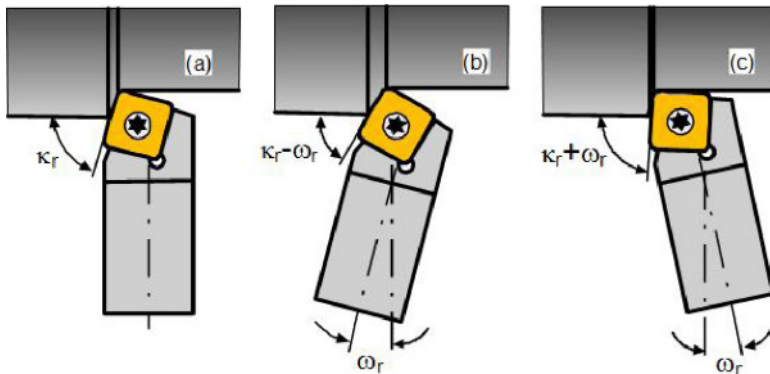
The tool cutting edge angle depends on the setting angle
